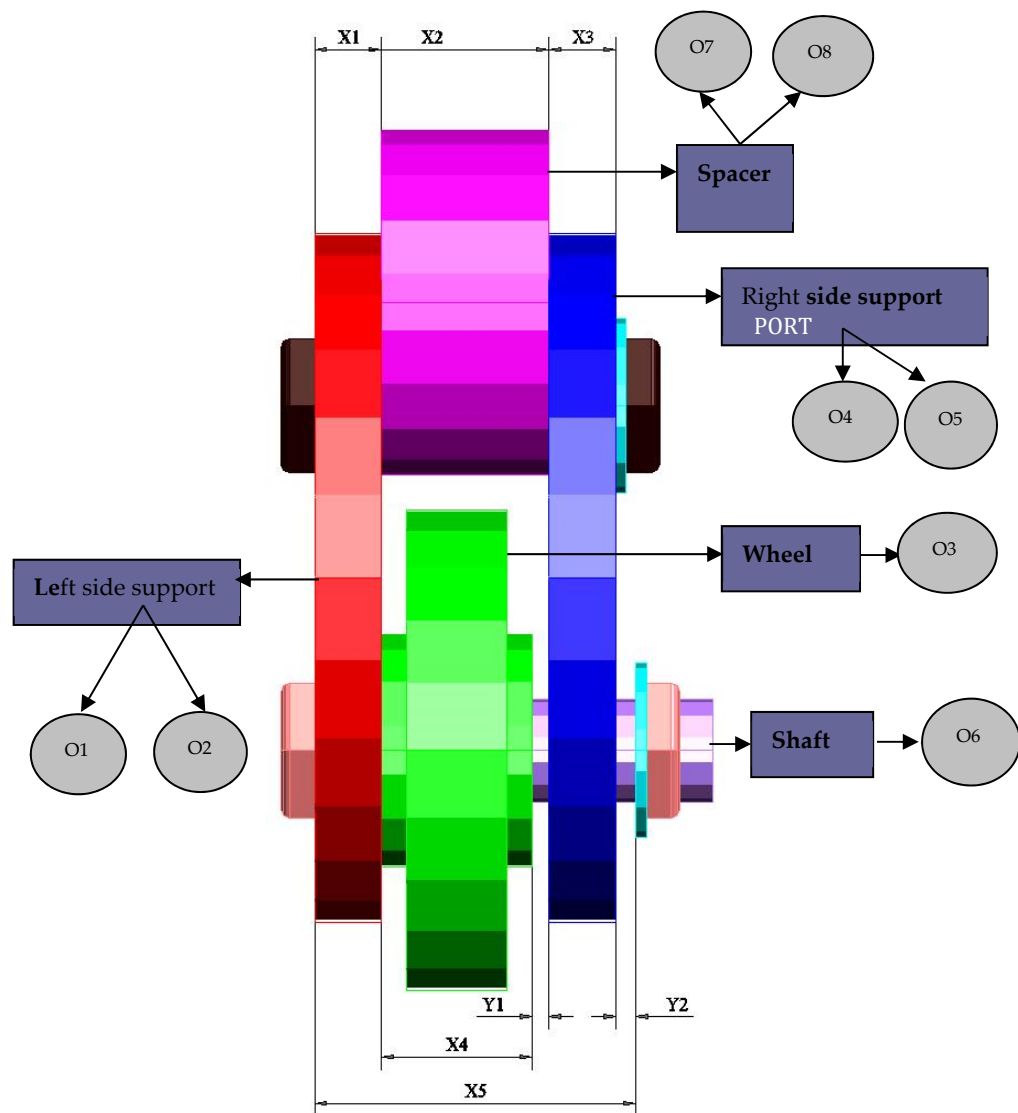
Wheel Mounting Assembly (WMA) [Geetha et al. (2013)]
